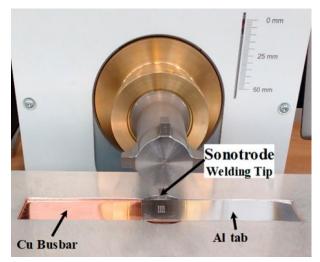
Types of ultrasonic metal spot welding machines
